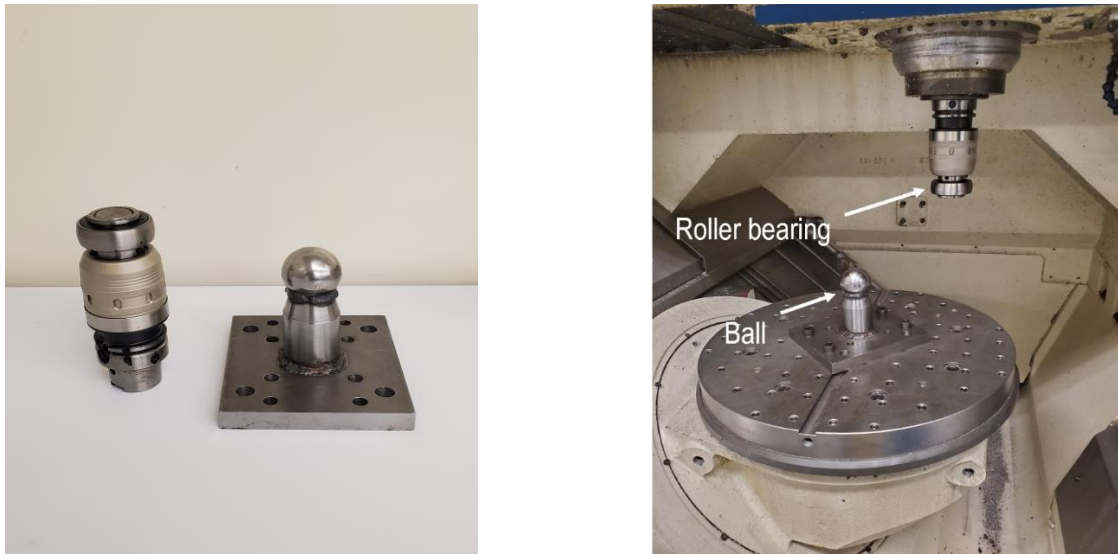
Photos of BRBD (left) mounted on a machine tool ready to test (right).
